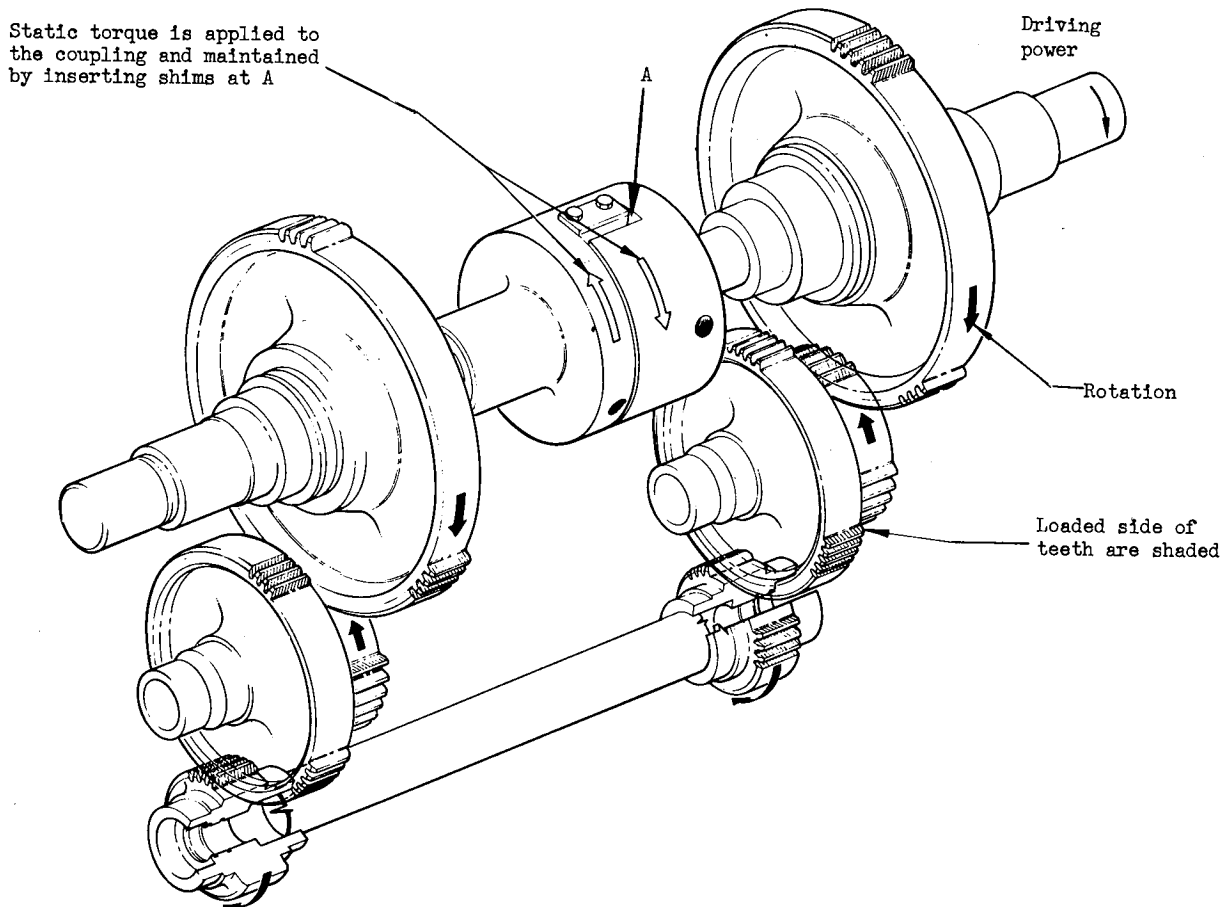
Sketch of gear arrangement in a back-to-back gear tester.
